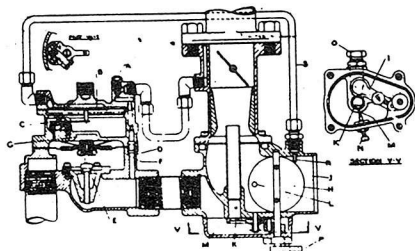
Ensign Gas Carburetor and Fuel Regulator
